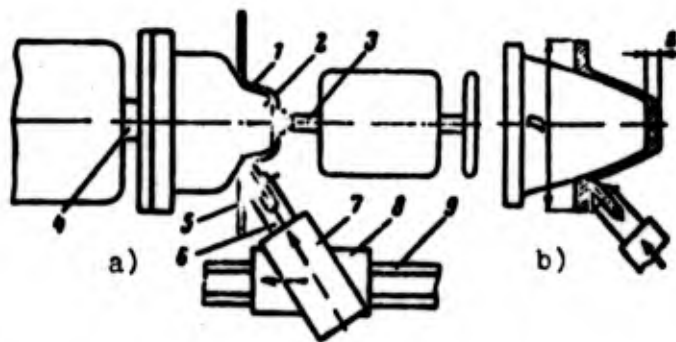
Diagram of the pressing of thin-walled parts. 1 - billet; 2 - mandrel; 3 - clamp; 4 - spindle of the machine; 5 - molding roller; 6 - holder; 7 - hydrocylinder; 8 - carriage; 9 - guides of the machine.
